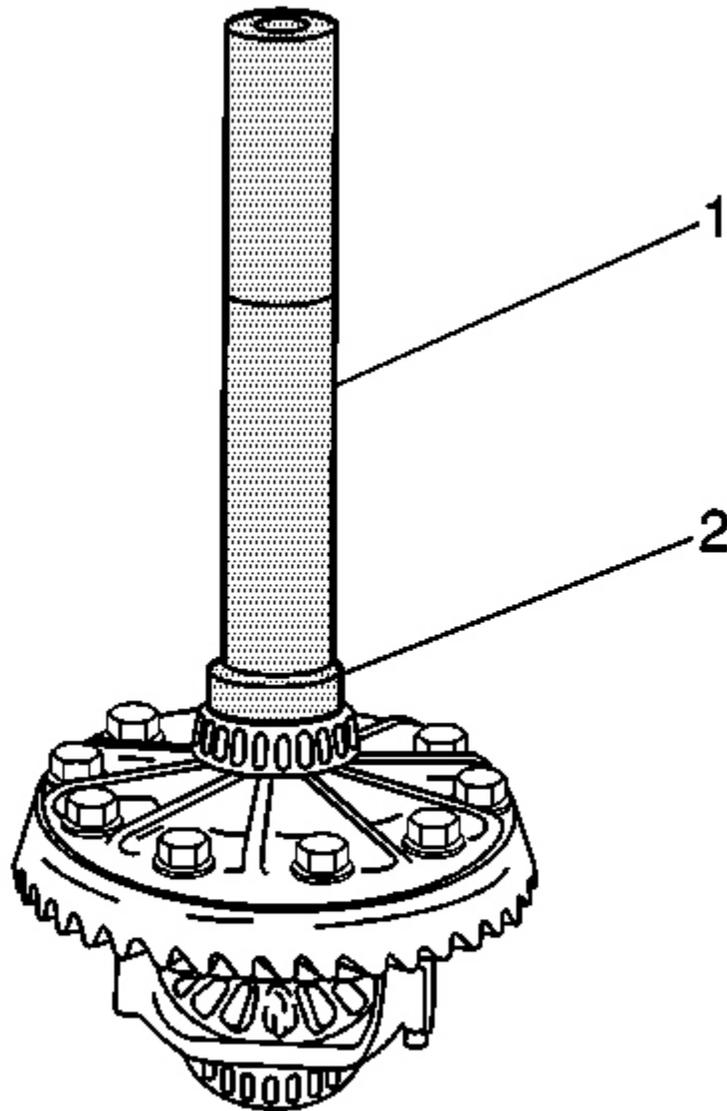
Driving The Differential Case Bearing Onto The Case J 8092 & J 22761 (8.25 Inch Axle)
